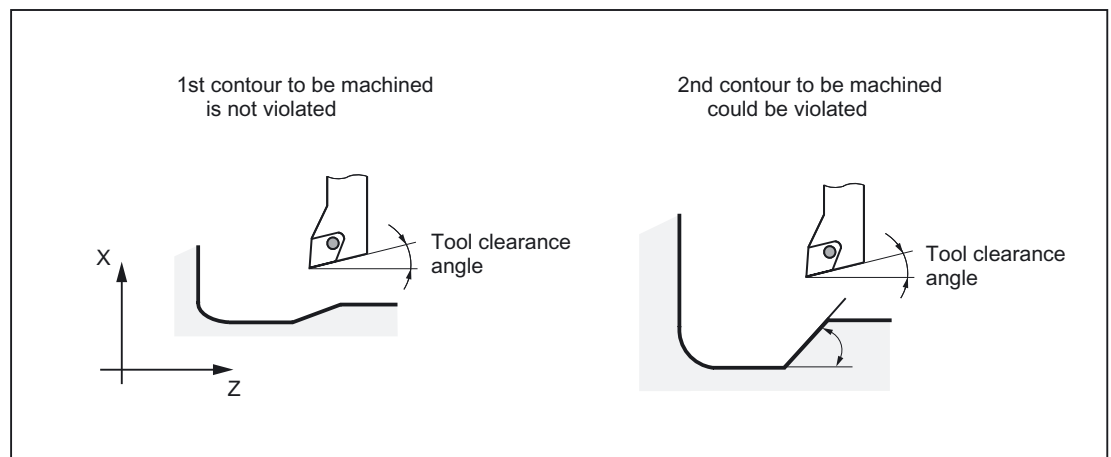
Tool clearance angle of the turning tool during relief cutting
